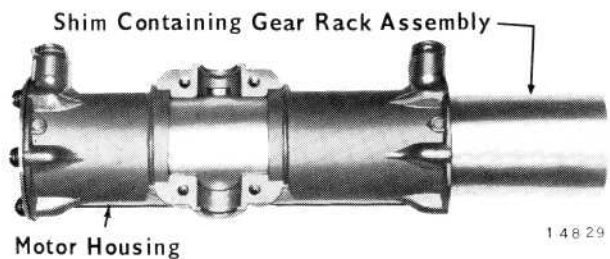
Replacing Gear Rack Assembly In Cylinder
